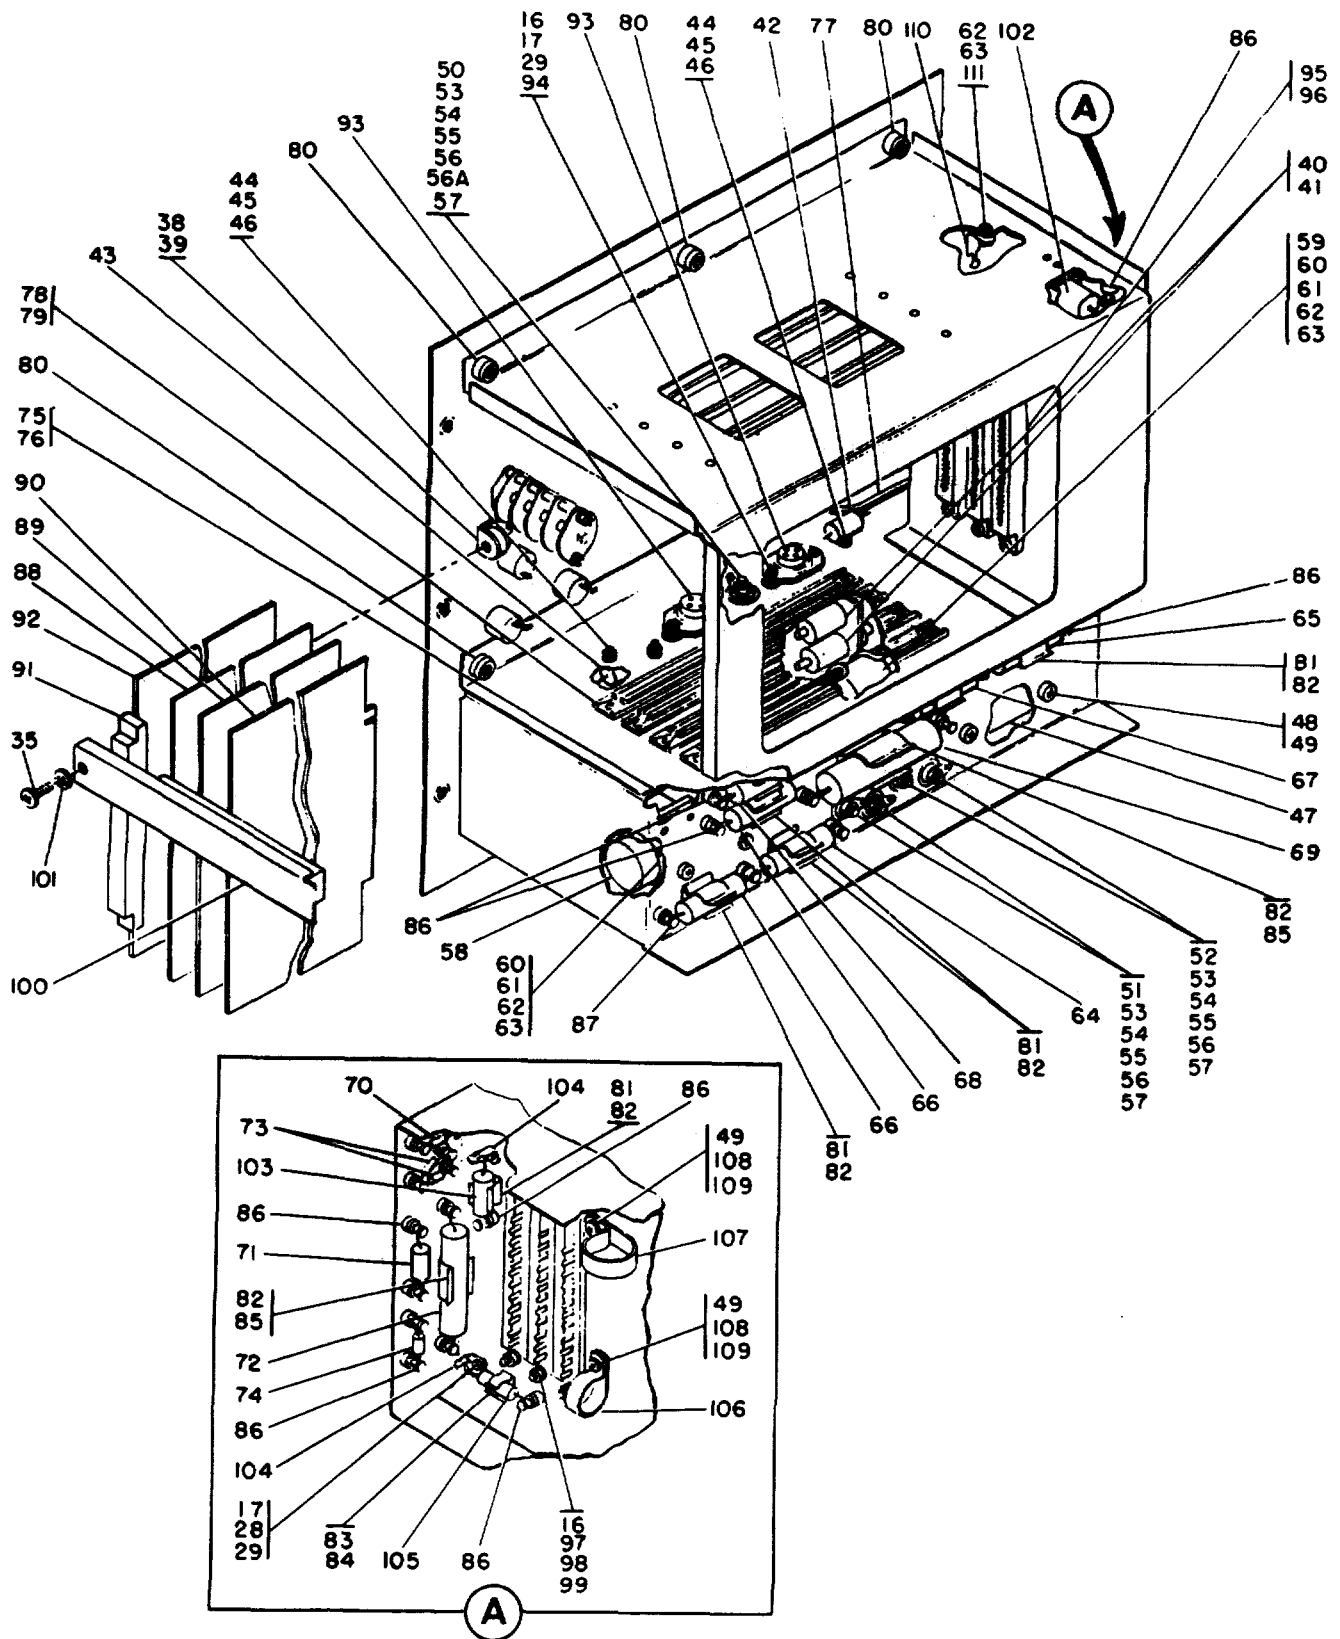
Panel and Chassis Assembly. Test Set Simulator (Sheet 2 of 2)
